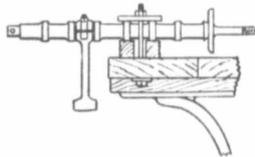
Showing how a Crank Shaft may be clamped to the bench.
